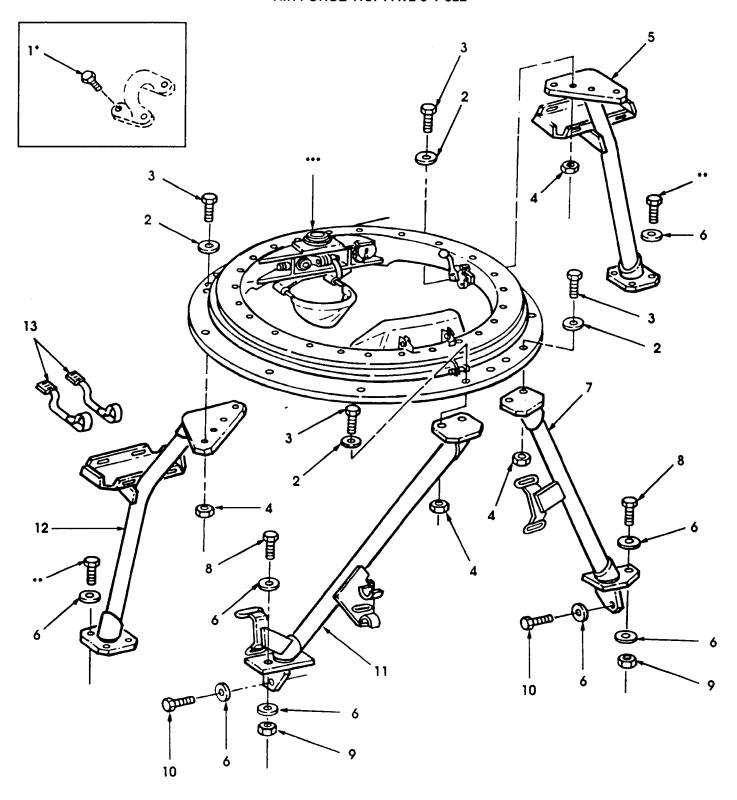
Machine Gun Mount, M548 11631740-2 (Assembled View).
